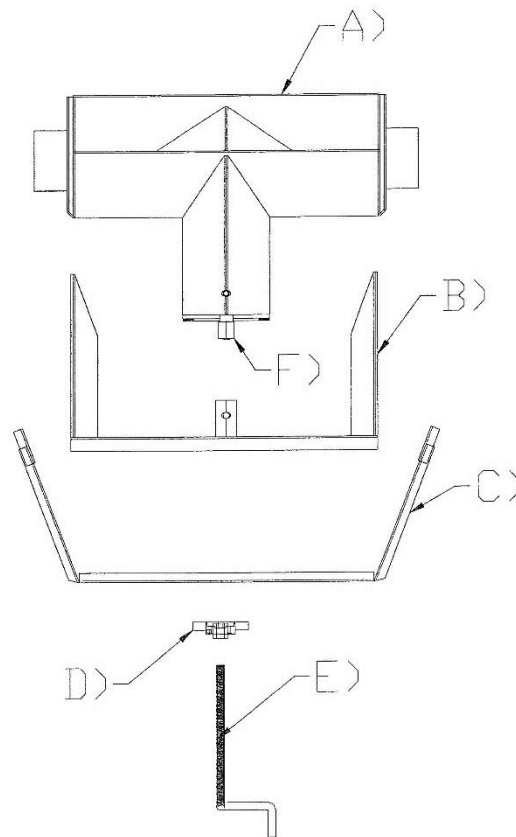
Exploded view of flow divider assembly (Chandler Spreaders, 2013).
